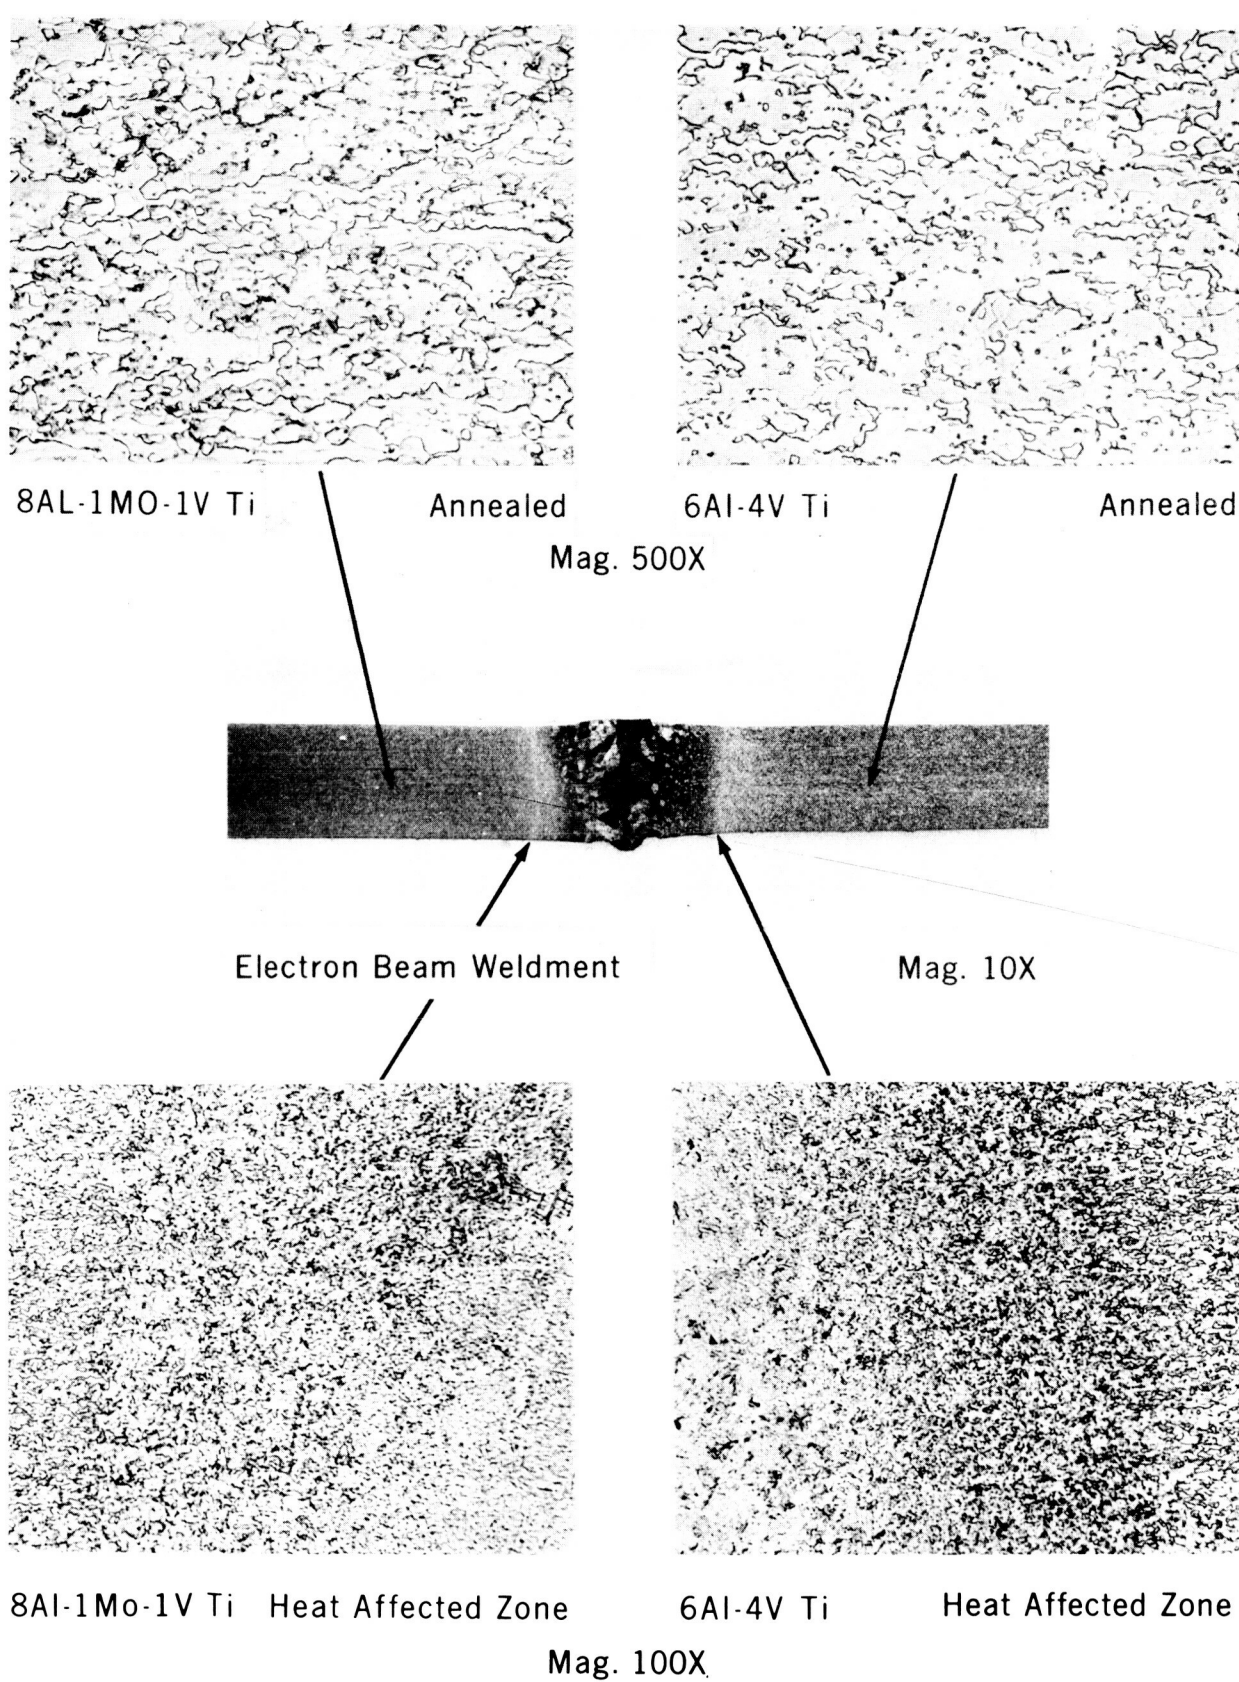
STRUCTURE OF ELECTRON BEAM WELDMENT
